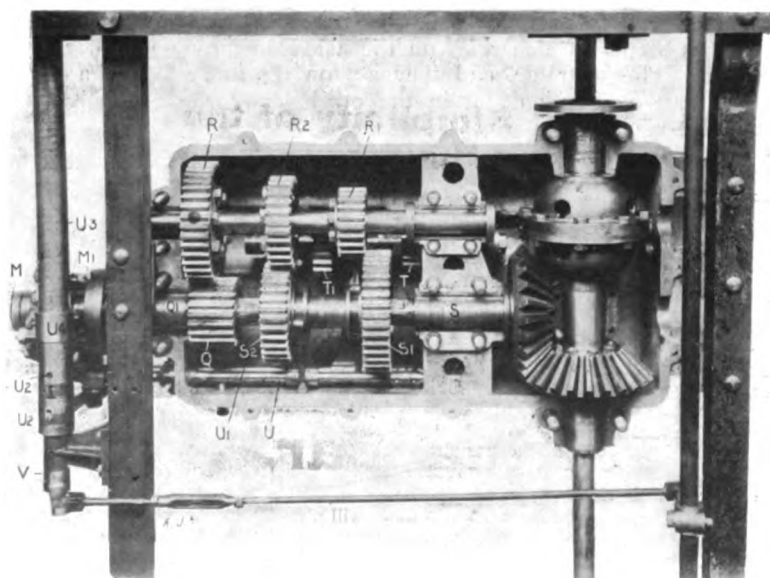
View, from above, of the Gear-box on the 35-h.p. Brooke Car. In this illustration, the upper half of the gear-box has been removed to show the interior mechanism.
